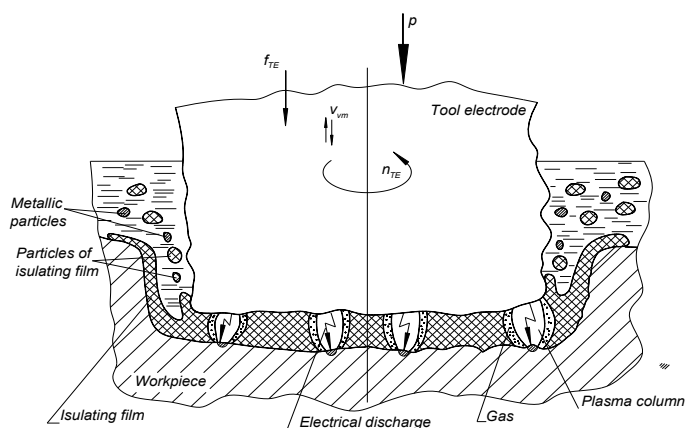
Detail from machining zone in case of electrochemical discharge drilling process
